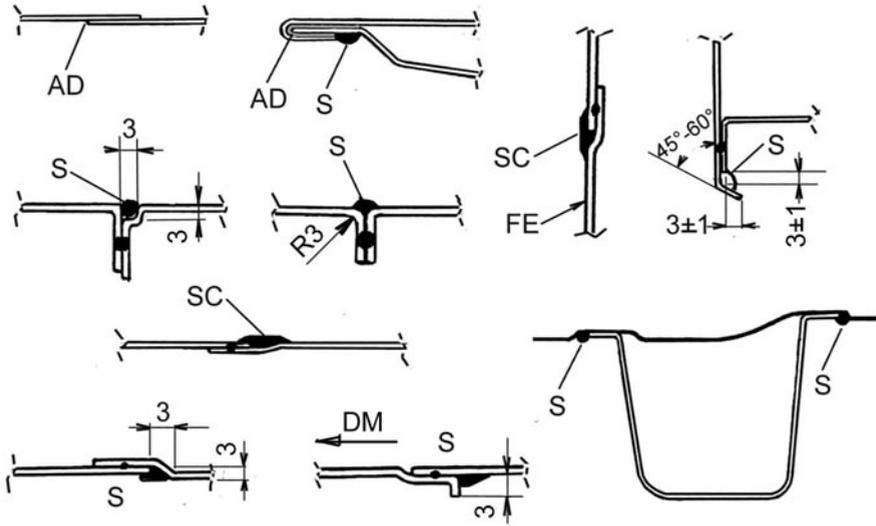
Typical sealing solutions, suggested for different kind of joints. AD: adhesive; S: sealant; SC: extruded seal; FE: body side outer; DM: vehicle direction.
